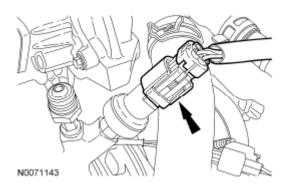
Locating CKP Sensor Electrical Connector Courtesy of FORD MOTOR CO.
